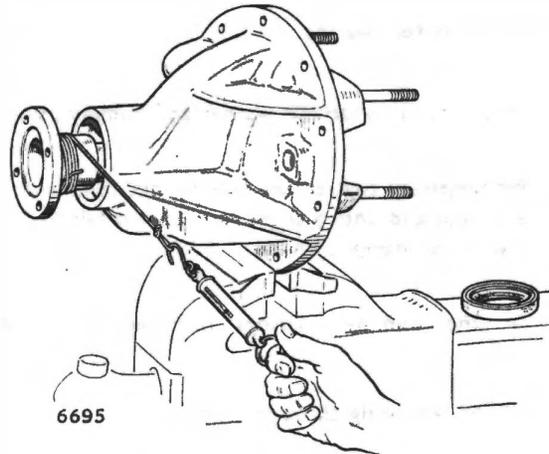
A. Checking torque loading (pre-load) of pinion bearings
